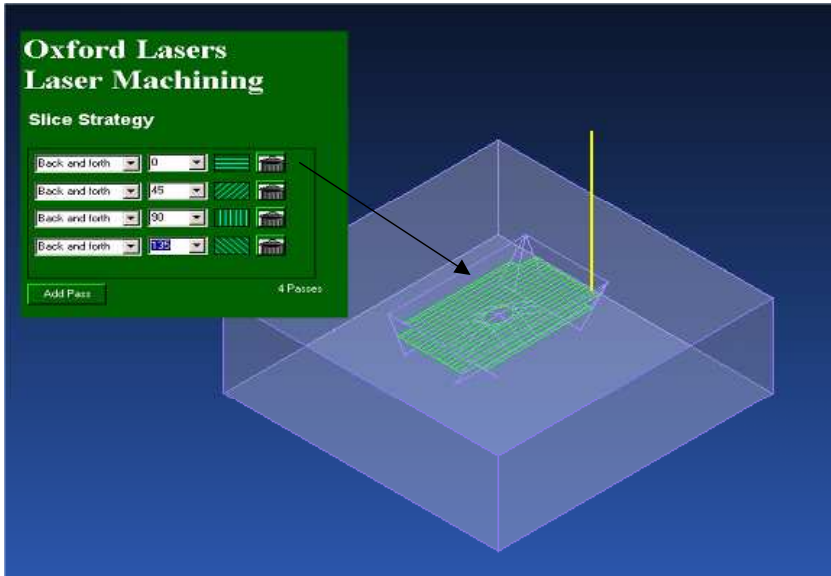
5-axis CAD/CAM interface for 2.5D laser machining.
